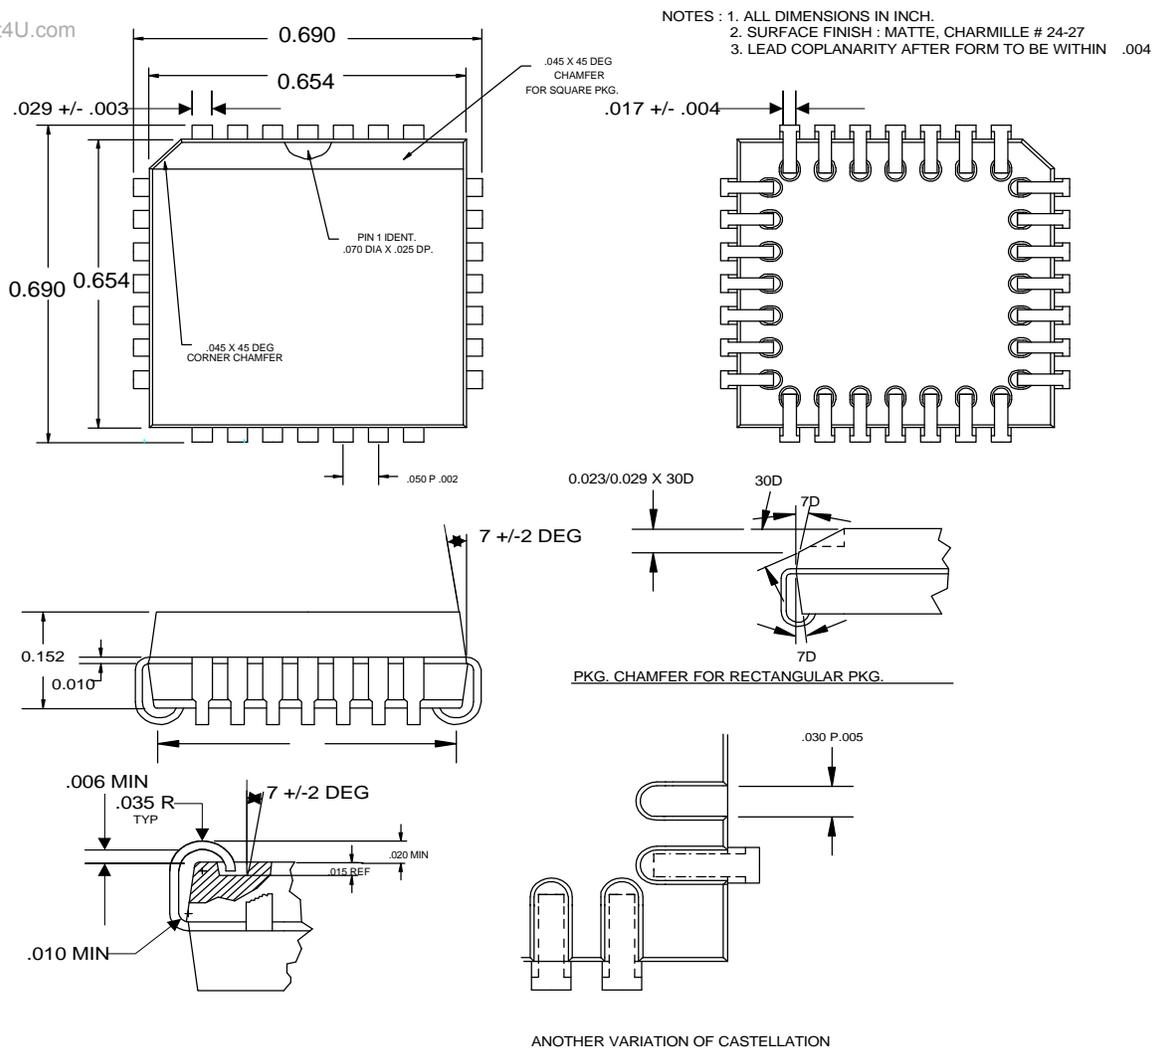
DEI1016B 44 Lead PLCC Package Dimensions
